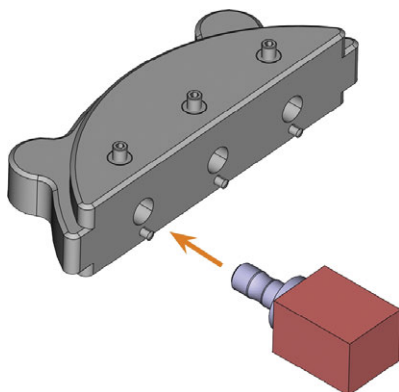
S5M: INSERTING A BLOCK INTO THE BLOCK HOLDER
